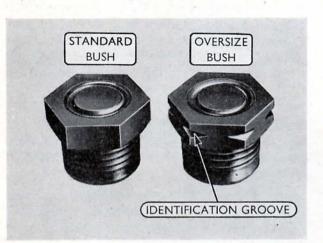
Standard and oversize screwed bushes. The amount of oversize is .005 in. and applies only to the external threads of the bush
